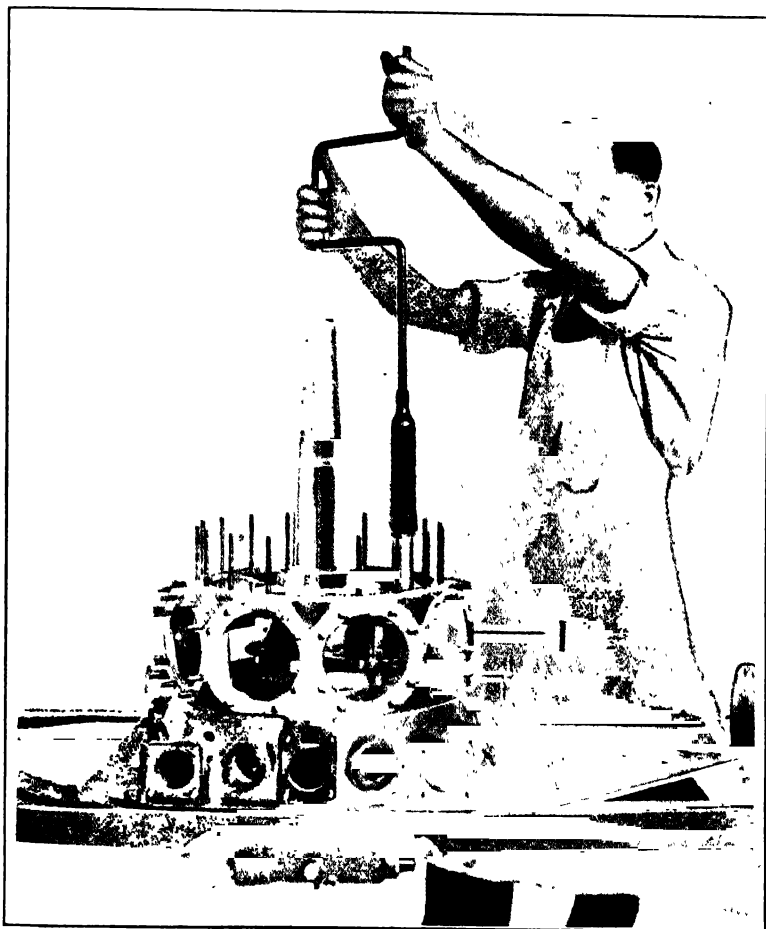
Removing Wright J5 Knuckle Pins Using Tools WA-92 and WA-168.
